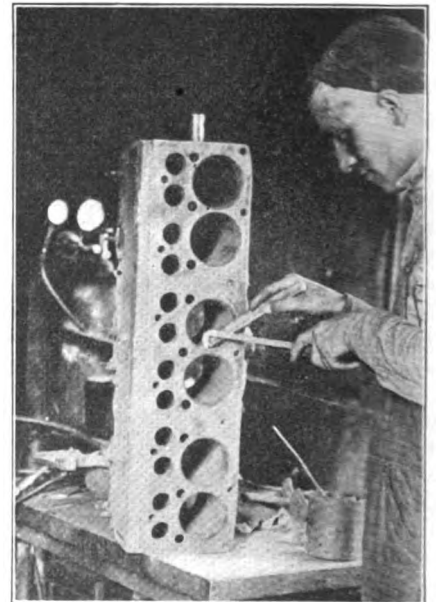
TINNING THE SCORES WITH A SPECIAL SOLDERING COPPER
